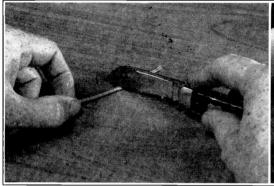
When the insulation on a wire is too tough to be broken by squeezing with pliers, the pocket knife technique illustrated here is employed by some radio men for cutting through the outer braided covering on the wire. The knife must be sharp, and must be held lightly so as to avoid cutting too far and nicking or breaking the copper wire.
